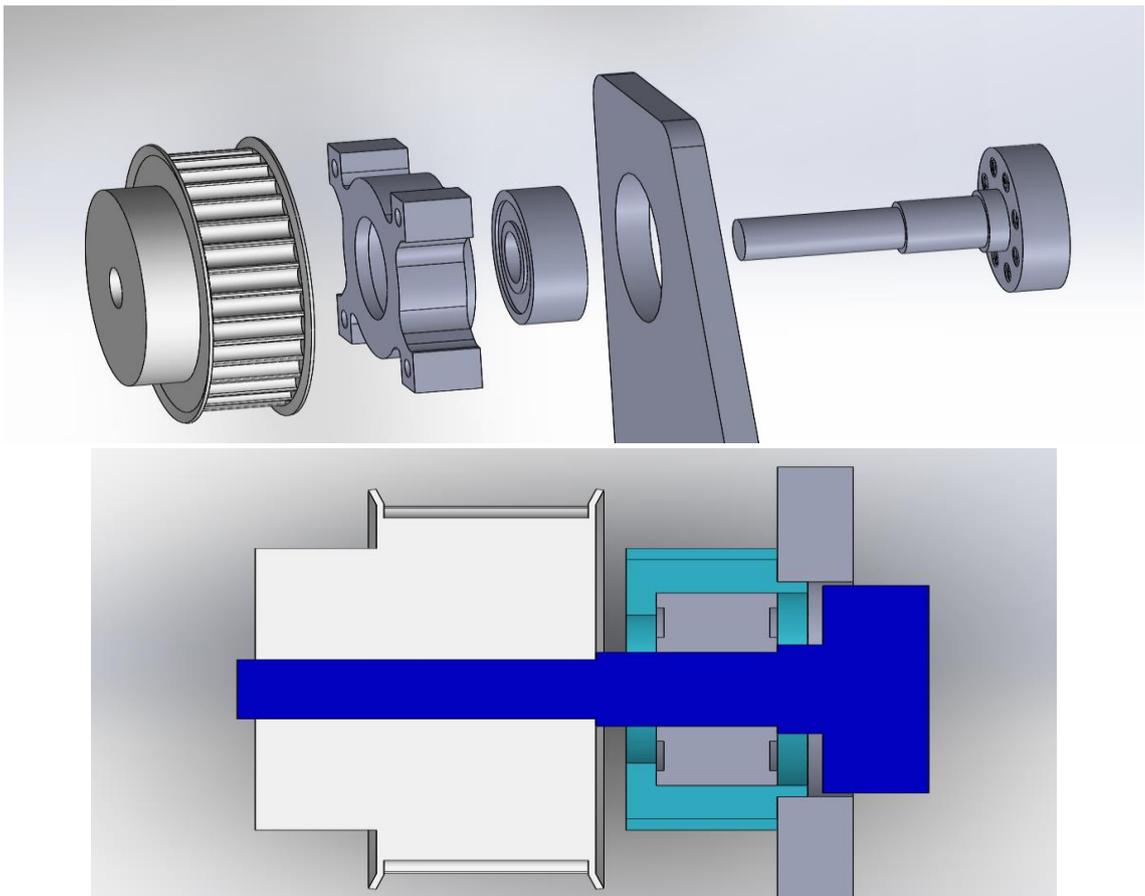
On top, exploded view of the driven assembly. On the bottom, the cross section of the assembly.
